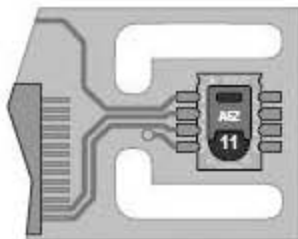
Top view of example of mounted SHT1x with slits milled into PCB to minimize heat transfer.
